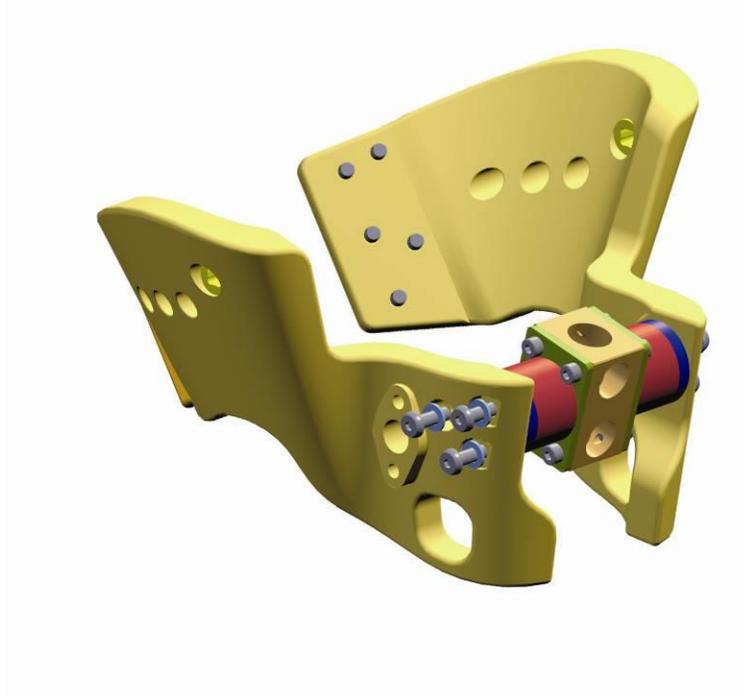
Separating molded pelvis bone from the pubis assembly
